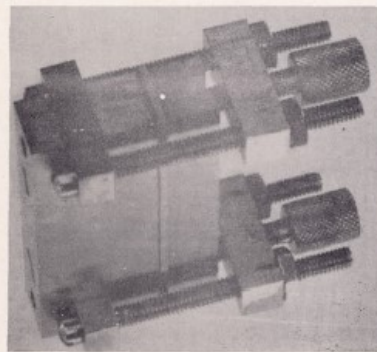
Steel guide fixture for compressive tests of thin sheet metal.
